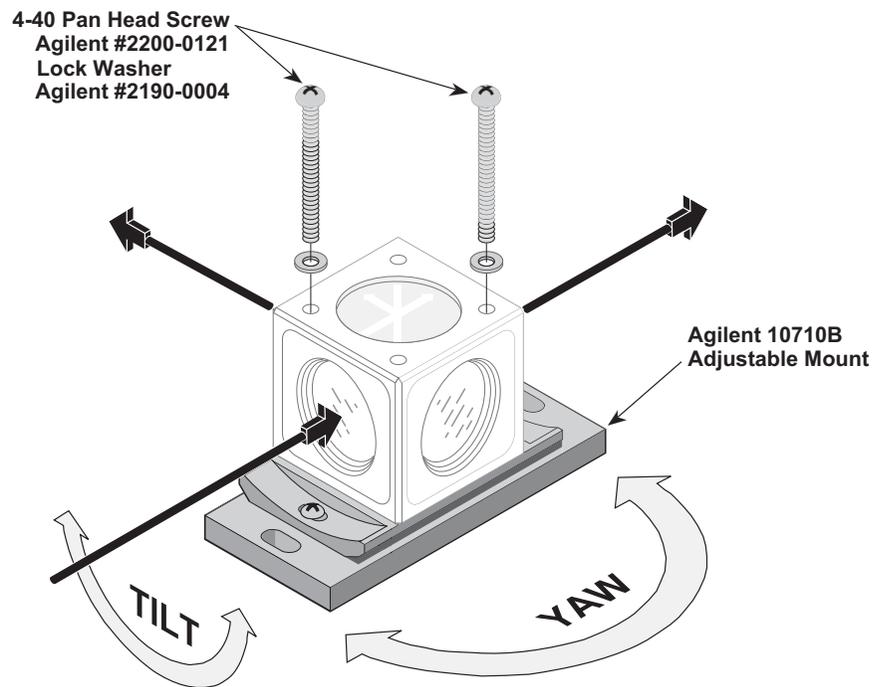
Horizontal plane mounting using the Agilent 10710B adjustable mount
